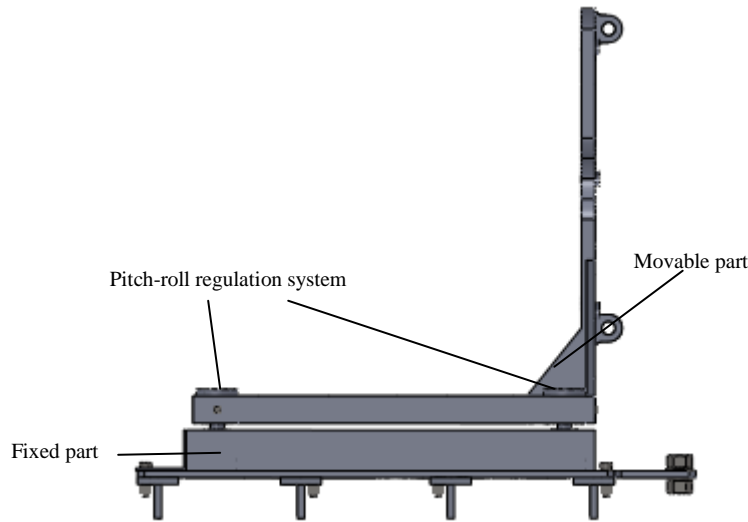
Fixed and movable part of the “L-shape” structure
